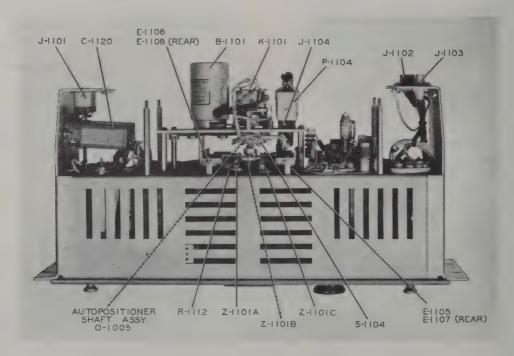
R-F Oscillator O-270/FRT-26, Top View, Covers Removed.
